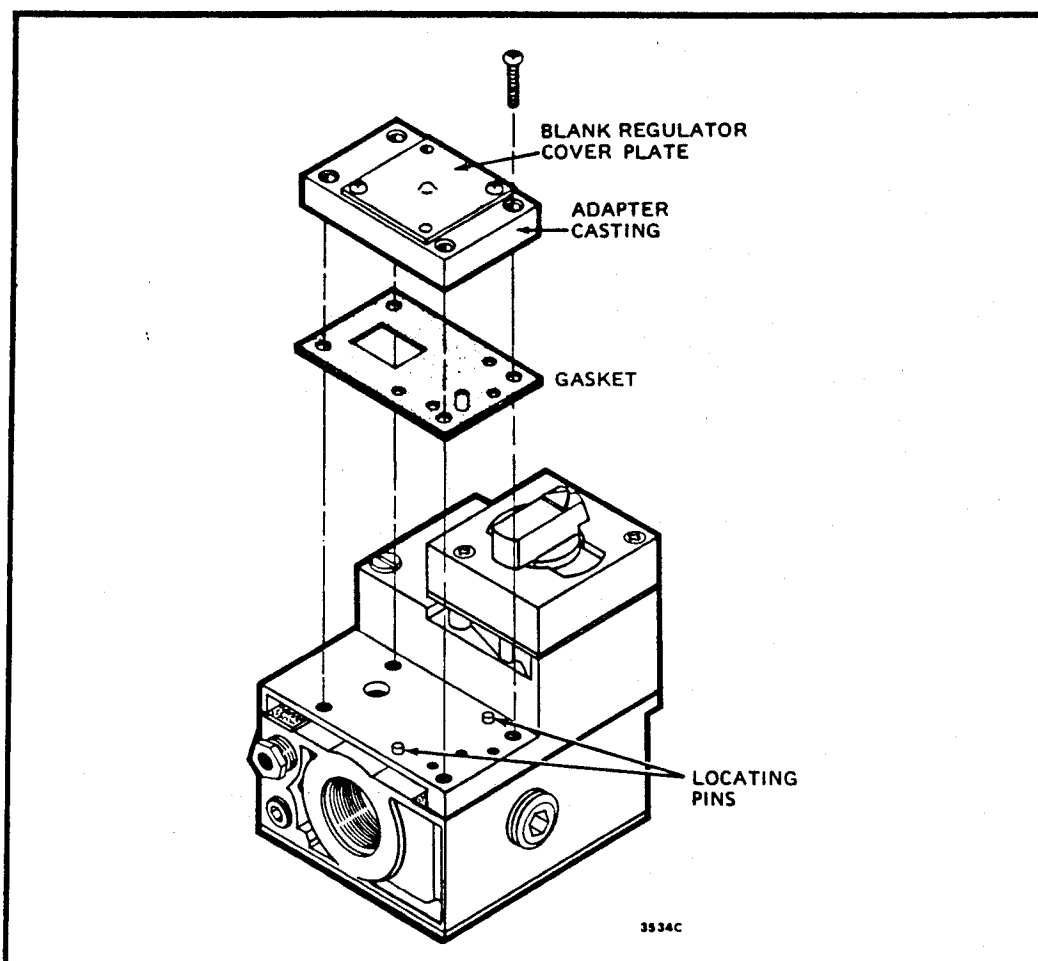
Remove the adapter casting and gasket from the gas control manifold before installing the operator.
